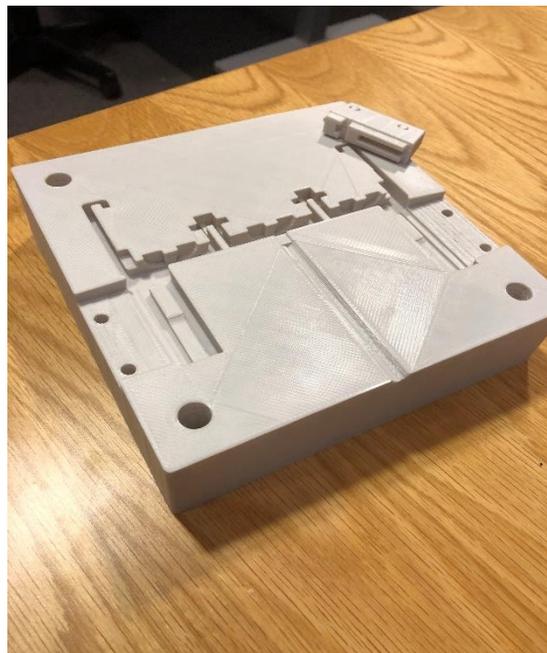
PLA model of the mold insert using Fused Deposition Modeling
